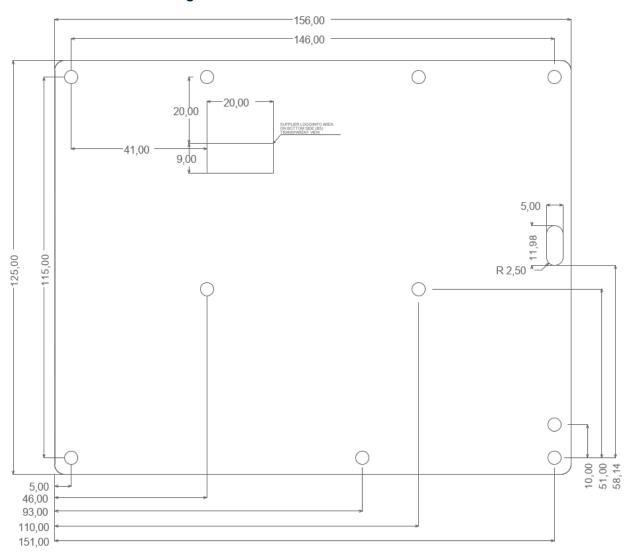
Board Mechanical Drawing (dimensions are in millimeters)
